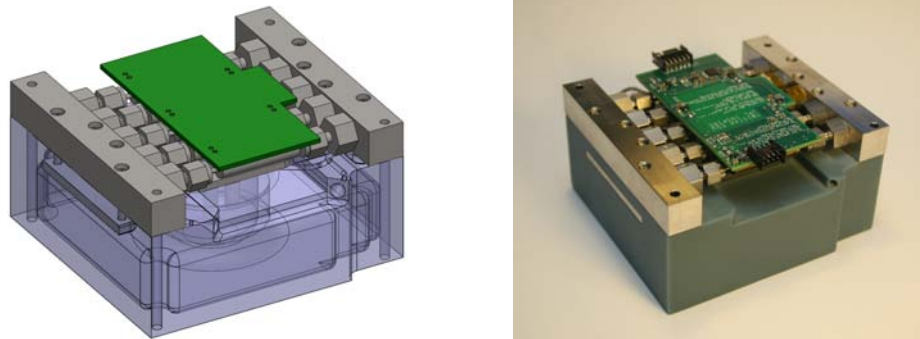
The EDU CAD design (left) and the assembled EDU
